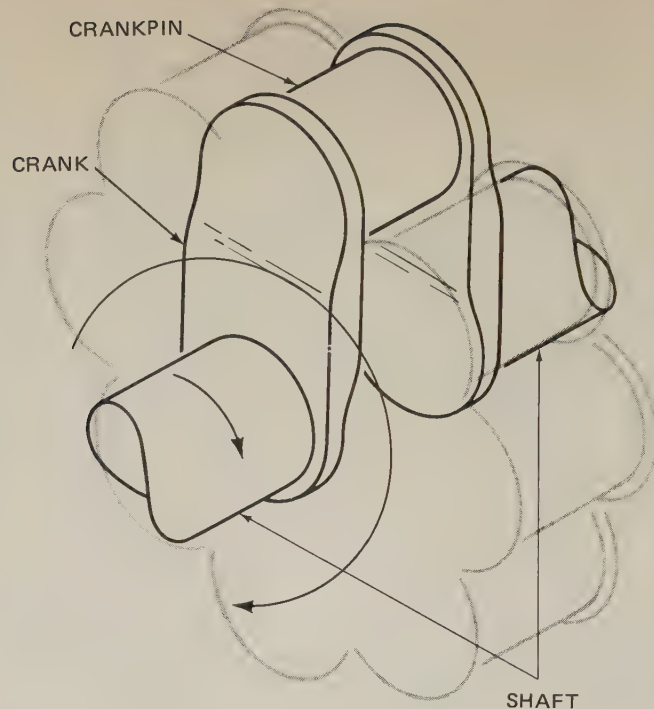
As the crankshaft rotates, the crank and crankpin swing in a circle around the shaft.
